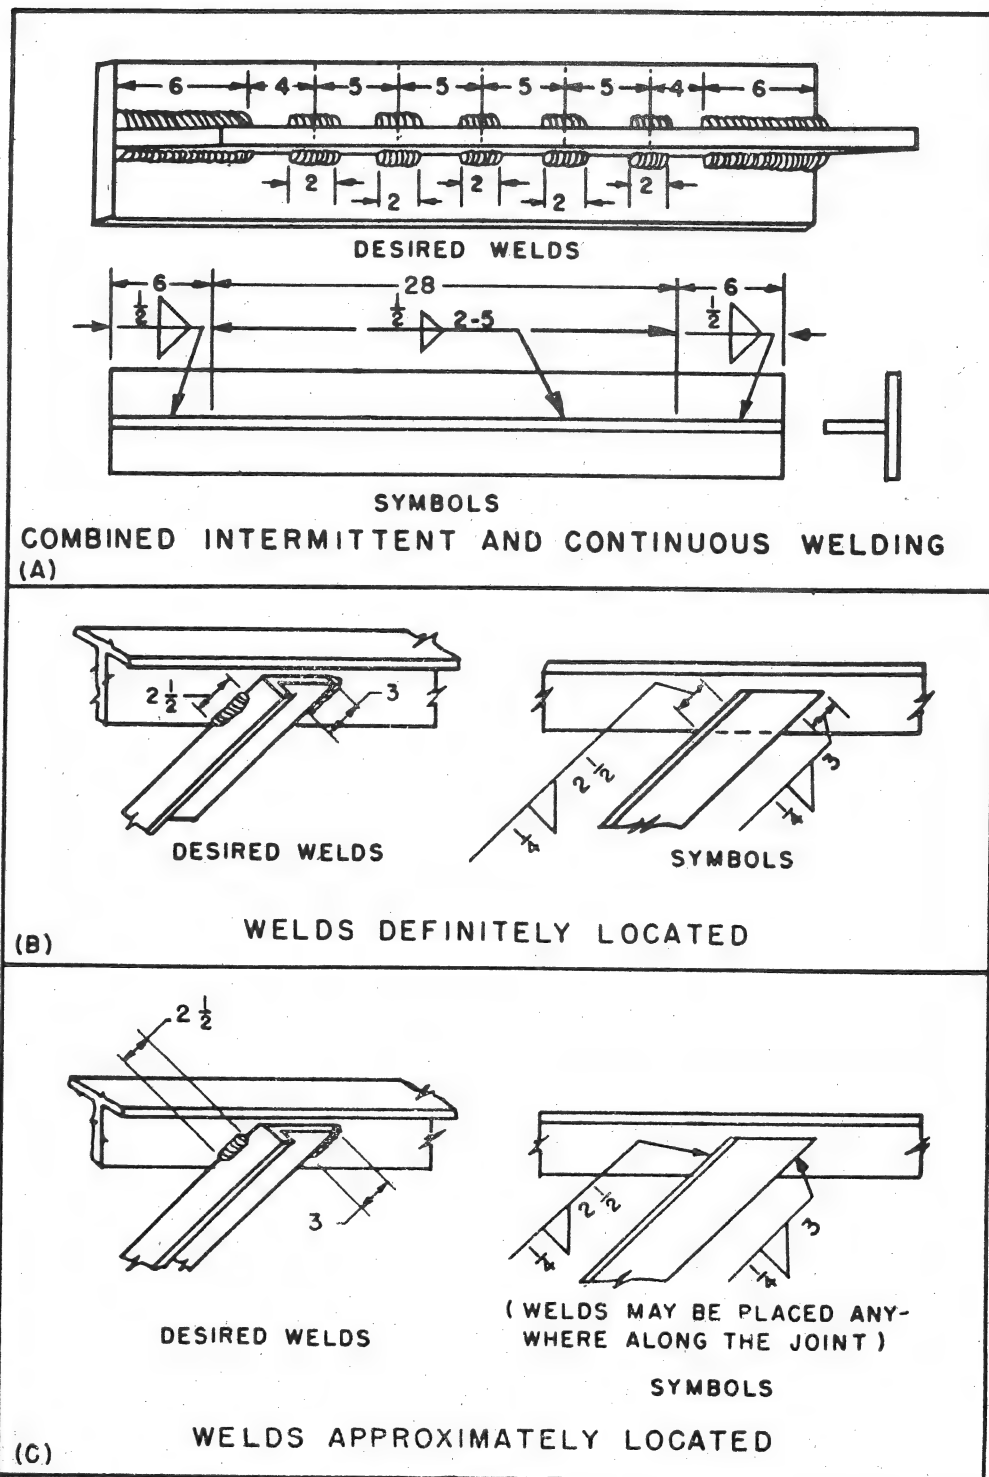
Designation of Location and Extent of Fillet Welds
